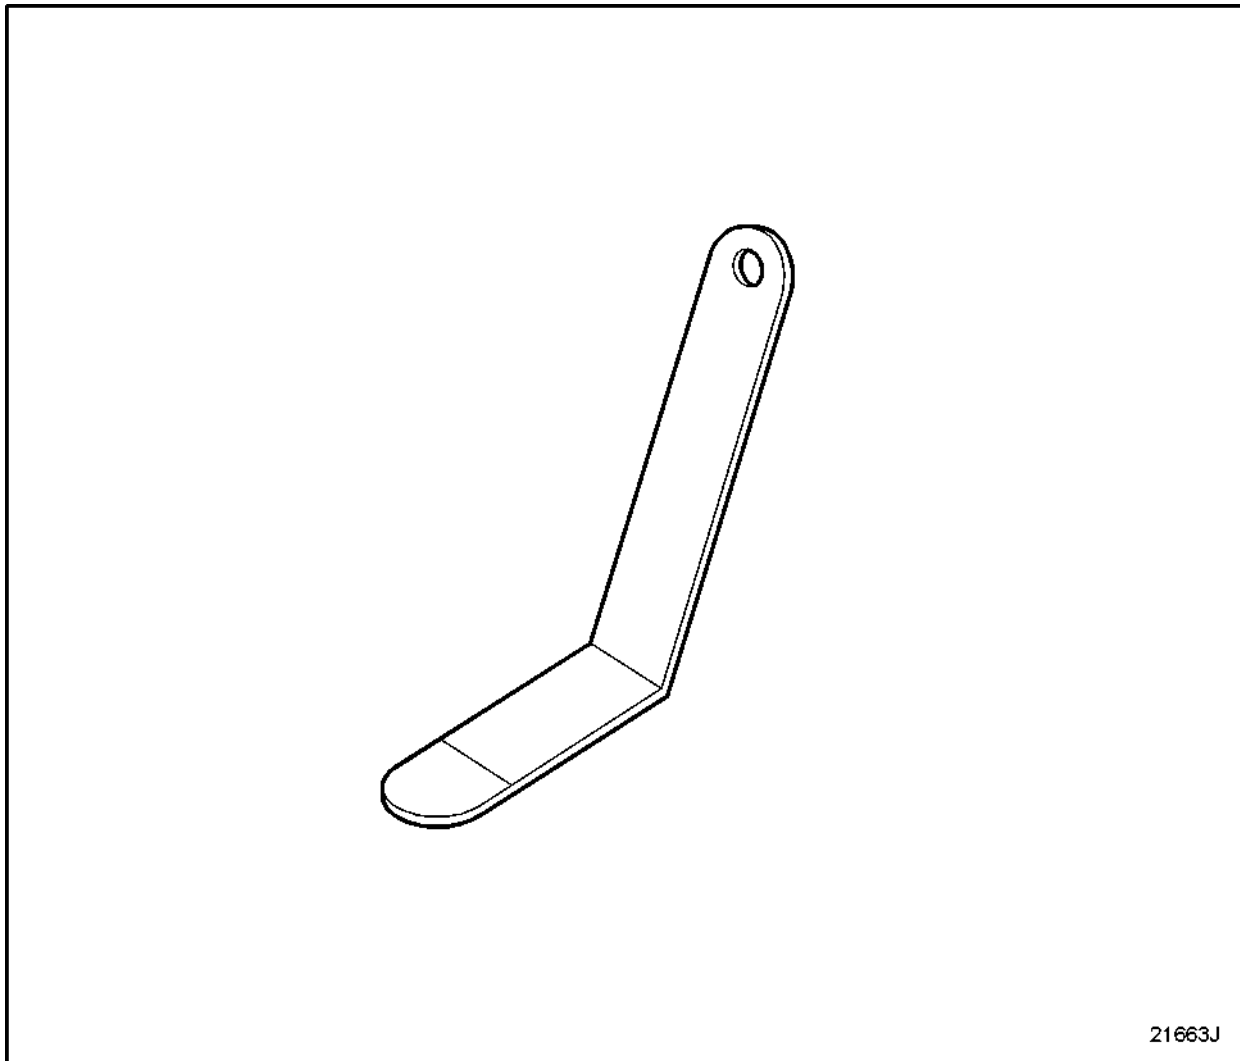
Feeler GA (.20) Exhaust VLV Lash,J 9708-20
